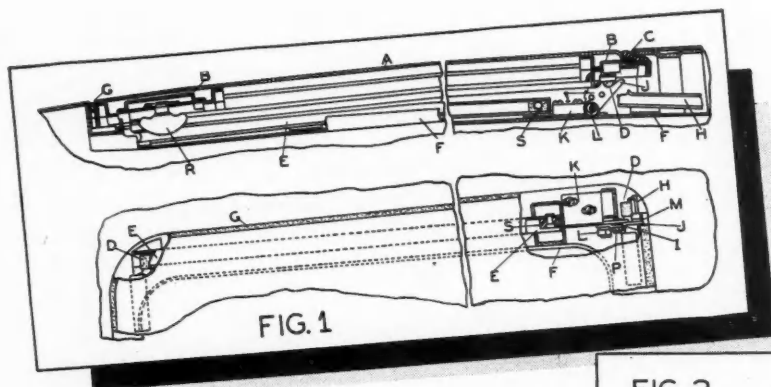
Longitudinal vertical section and plan view, with parts broken away, of sliding roof panel
